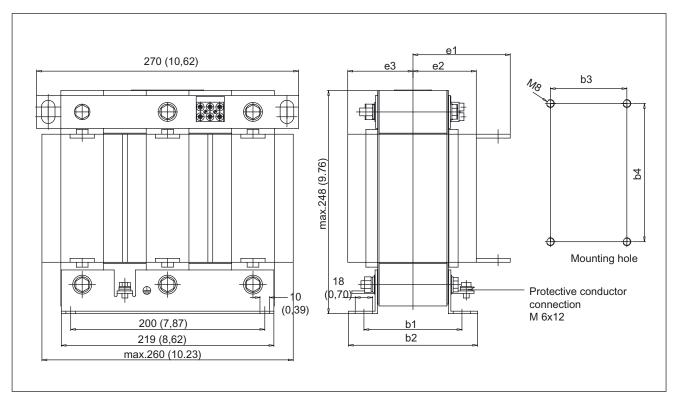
Dimension drawing: Motor reactor, frame size FSE
